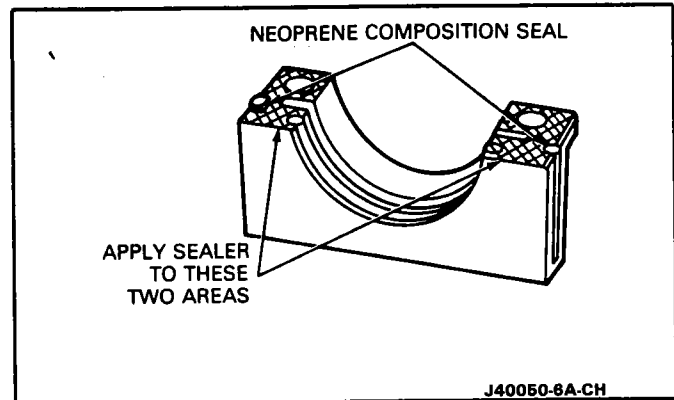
Sealer Application on Rear Main Bearing Cap 3.0 and 3.8L Shown
